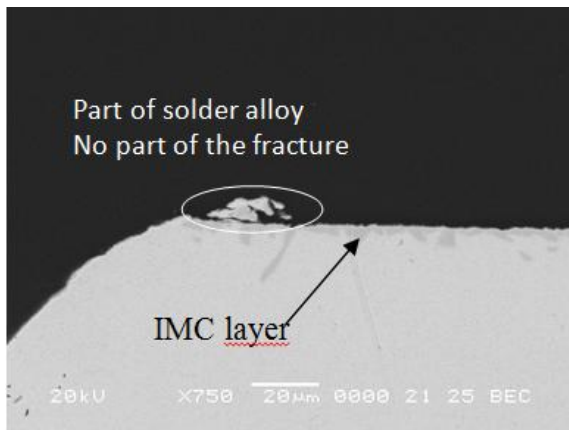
Example of fracture between Cu and IMC layer (only IMC and solder left after cracking)
